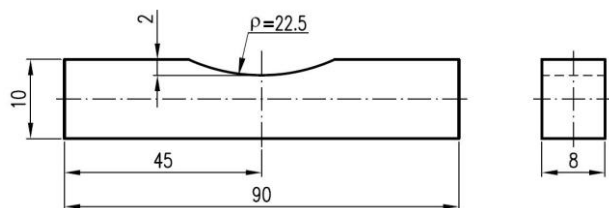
Shape and dimensions of specimens for fatigue crack growth tests, dimensions in mm
